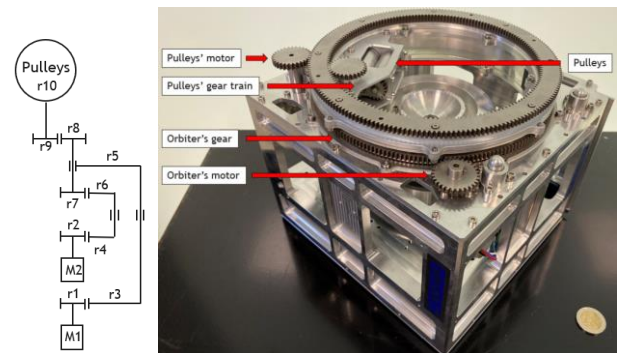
Schematic gear train diagram and manufactured tape Deployment Mechanism BreadBoard
